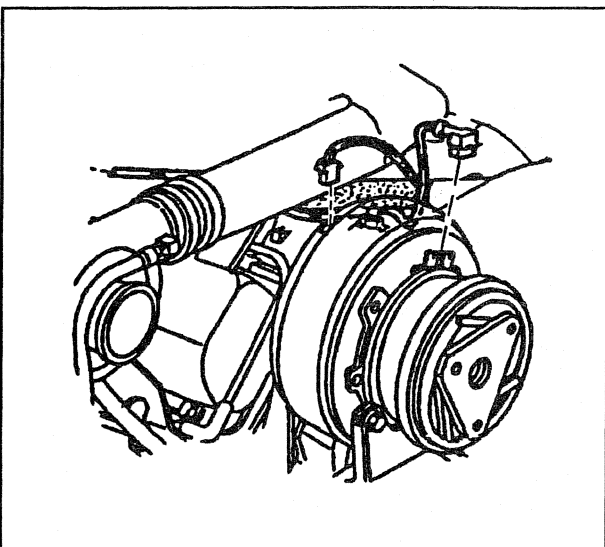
Engine Wiring to A/C Compressor (6.5L)
